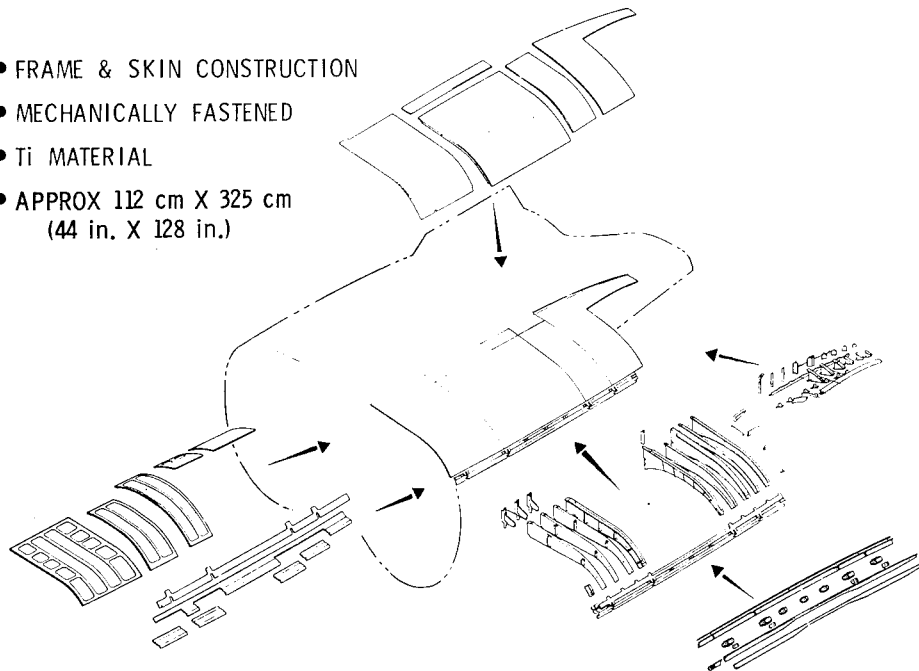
Typical state-of-the-art sheet metal fuselage assembly.
